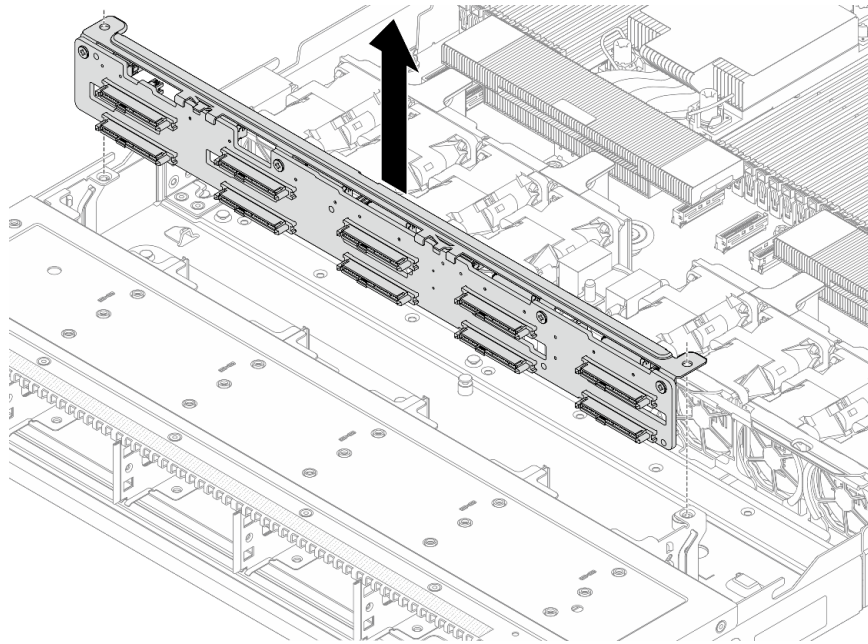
Removal of backplane for ten 2.5-inch hot-swap drives
